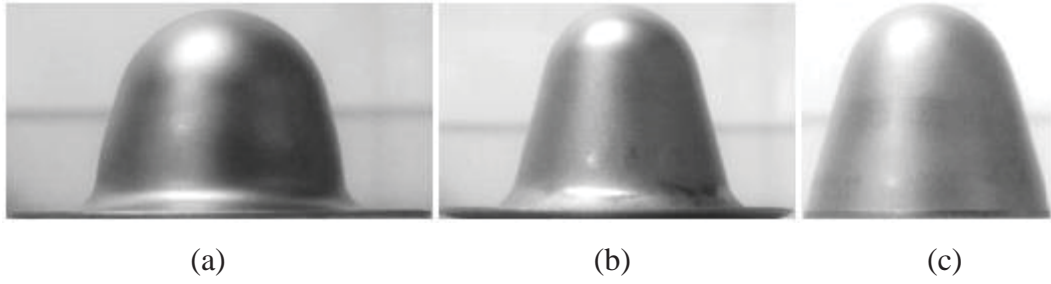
Shapes of inner core at the end of (a) first drawing, (b) second drawing, (c) trimming.
